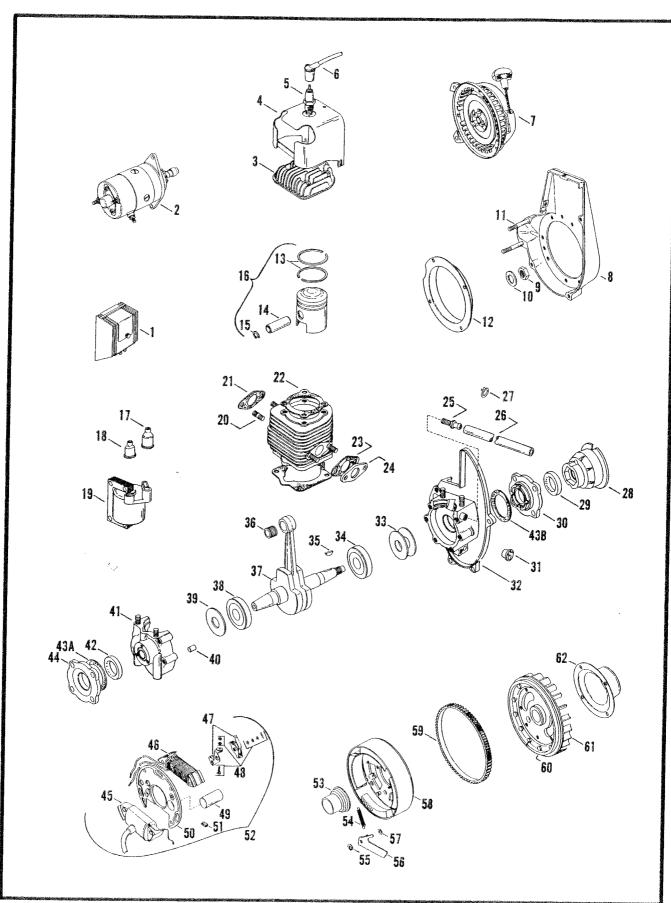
PARTS IDENTIFICATION DRAWING
